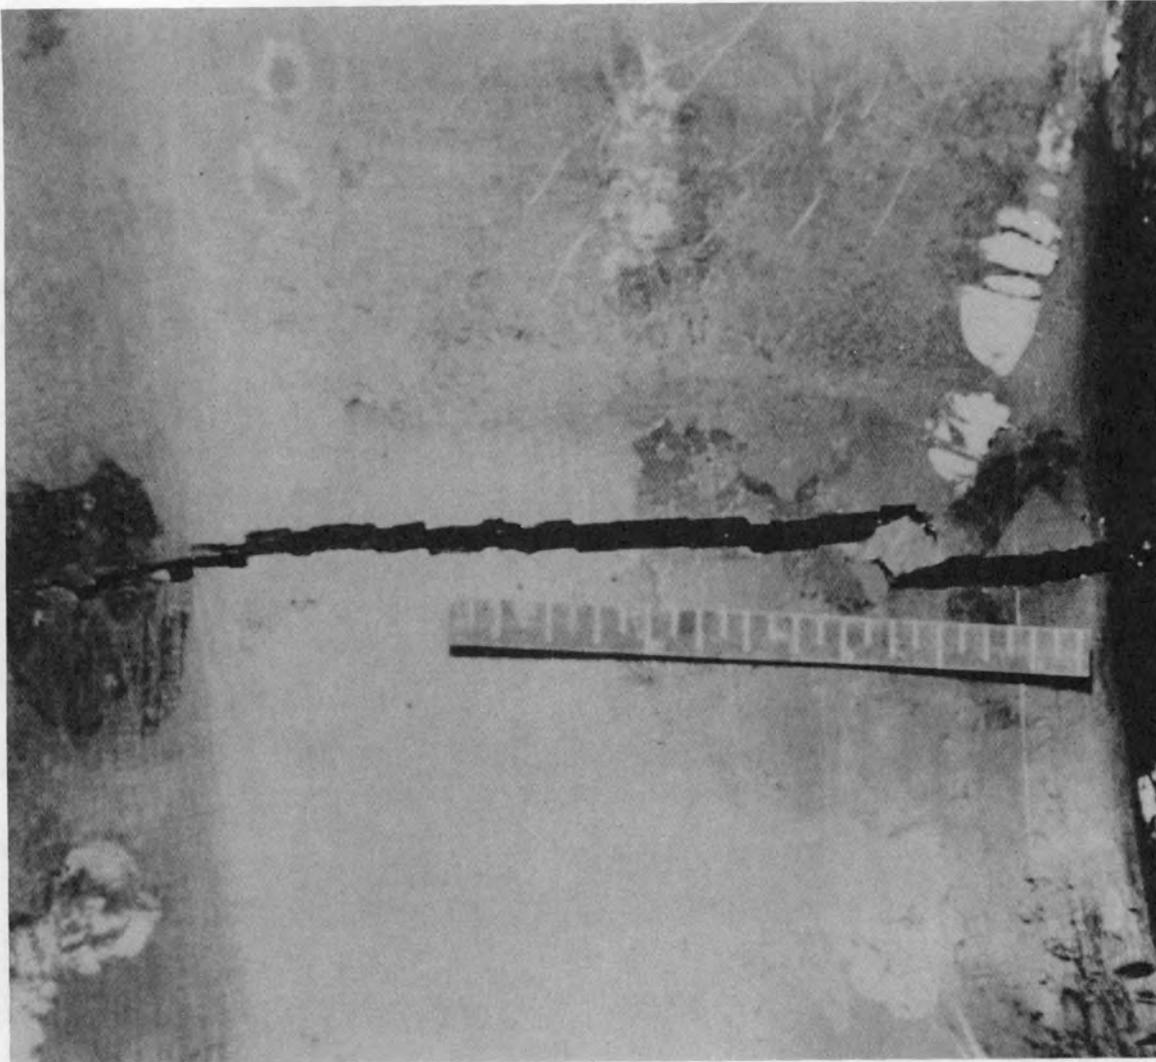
Close-up view of fatigue-failure crack on inside surface of T-11 (2875 cycles).
